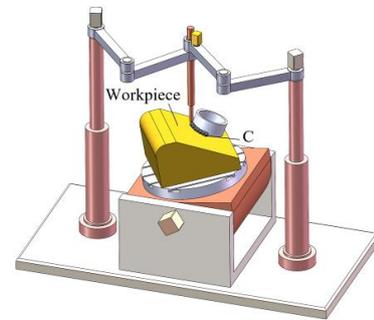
Closed-chain serial structure robot, performing arc welding.
